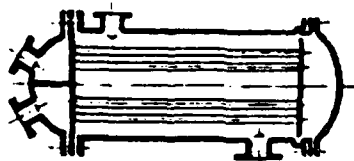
Diagram of heat exchanger with mobile tube plate and fixed cover/cap.
